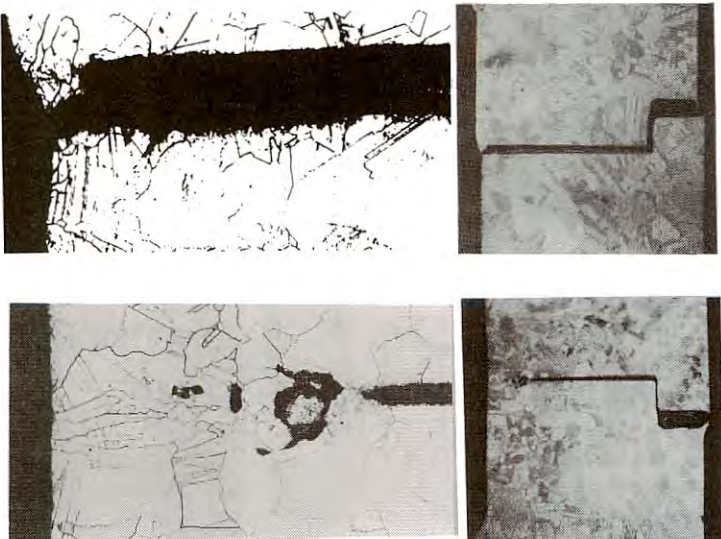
Magnified cross section of the electron beam welding point: insufficient weld (upper picture); normal weld (lower).
